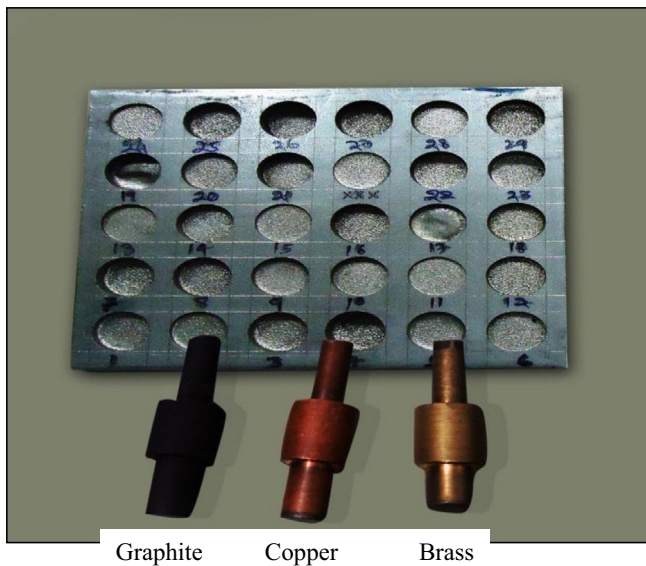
Work material Inconel 718 after machining with three electrodes.
